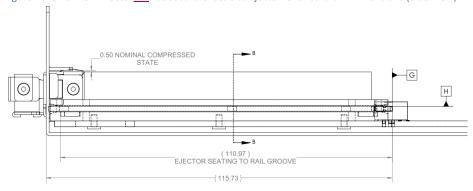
Small Form FactorSFF Baseboard Chassis CTF Dimensions (Rear Rail Guide View)
